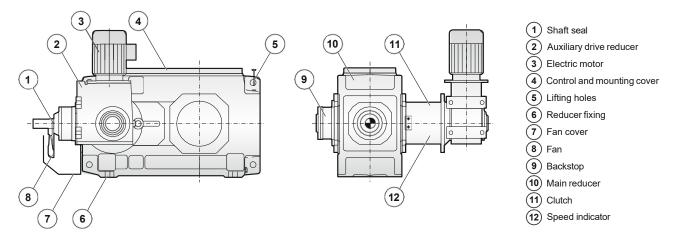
HB - H ≥ 13 Type Reducer Equipment
